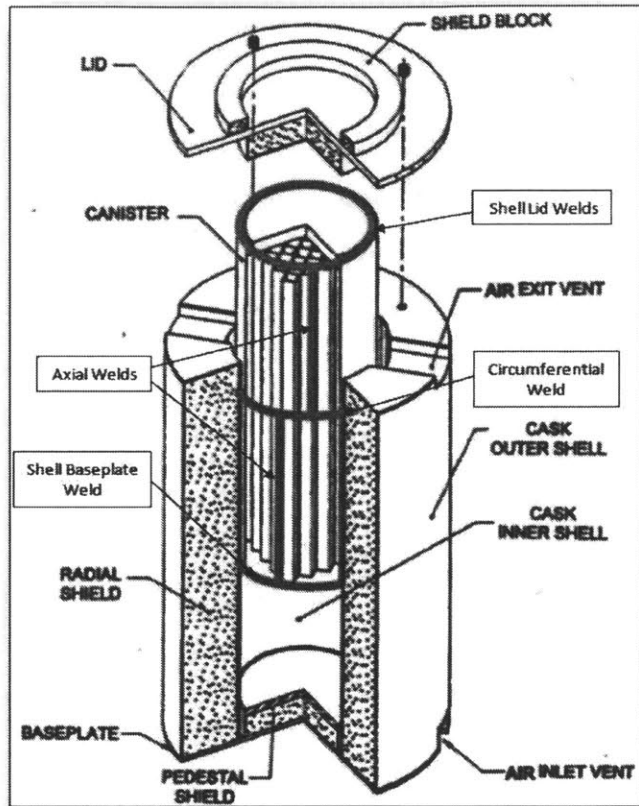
This diagram shows a dry storage system manufactured by Holtec. The locations of the welds used to fabricate the inner steel canister are highlighted in red. *Original diagram from Holtec; modified by B. Black.* [32]
